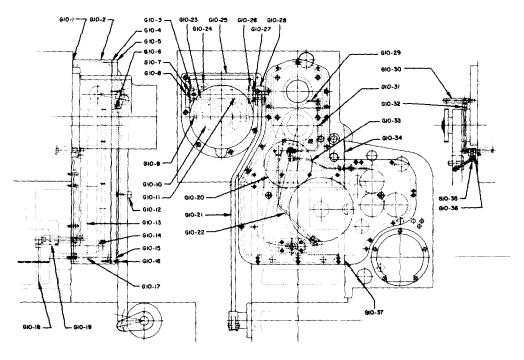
Change Gear Covers HEAD END AND CHANGE GEAR COVERS
